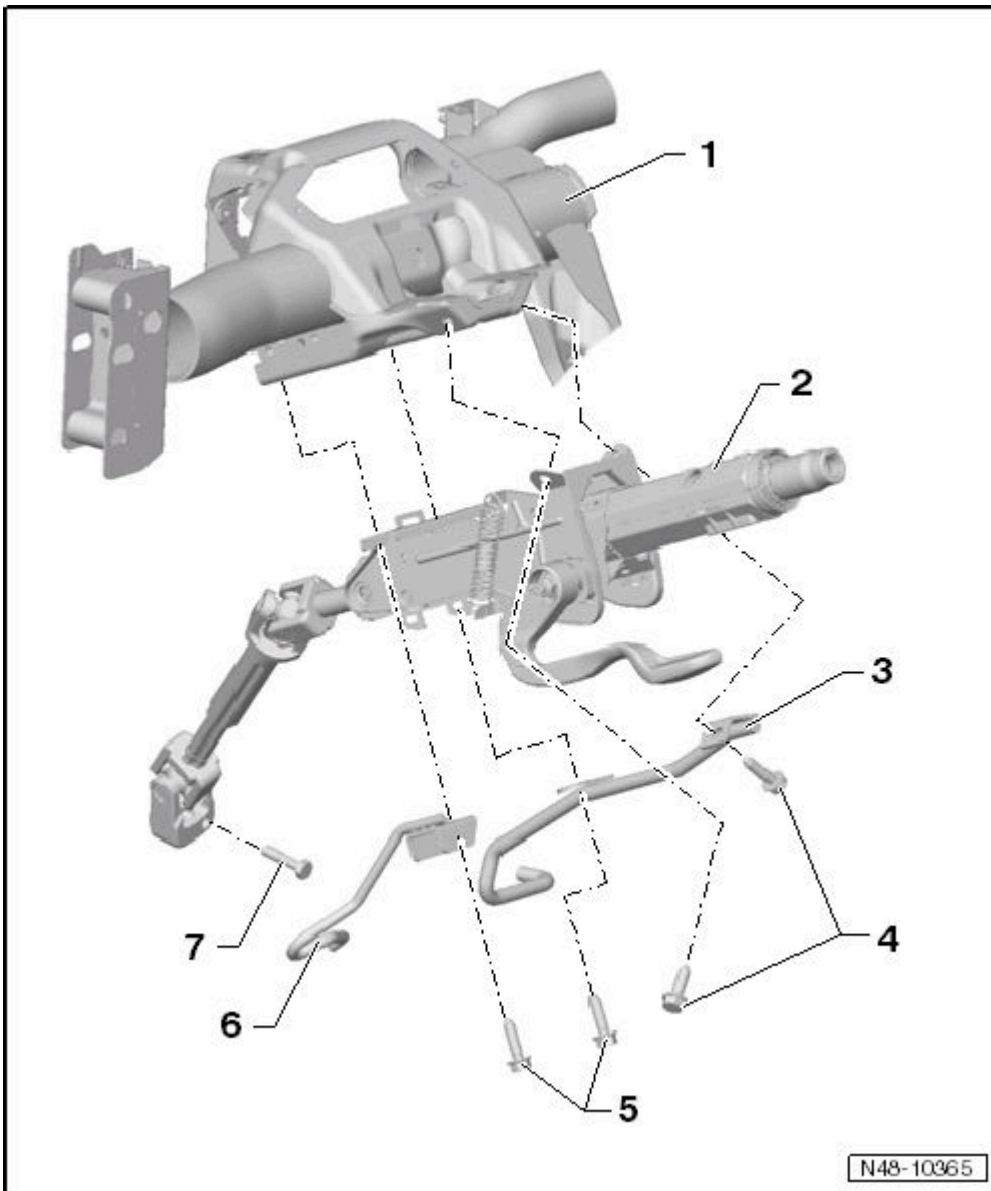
Identifying Steering Column Assembly Overview, From My 2009
